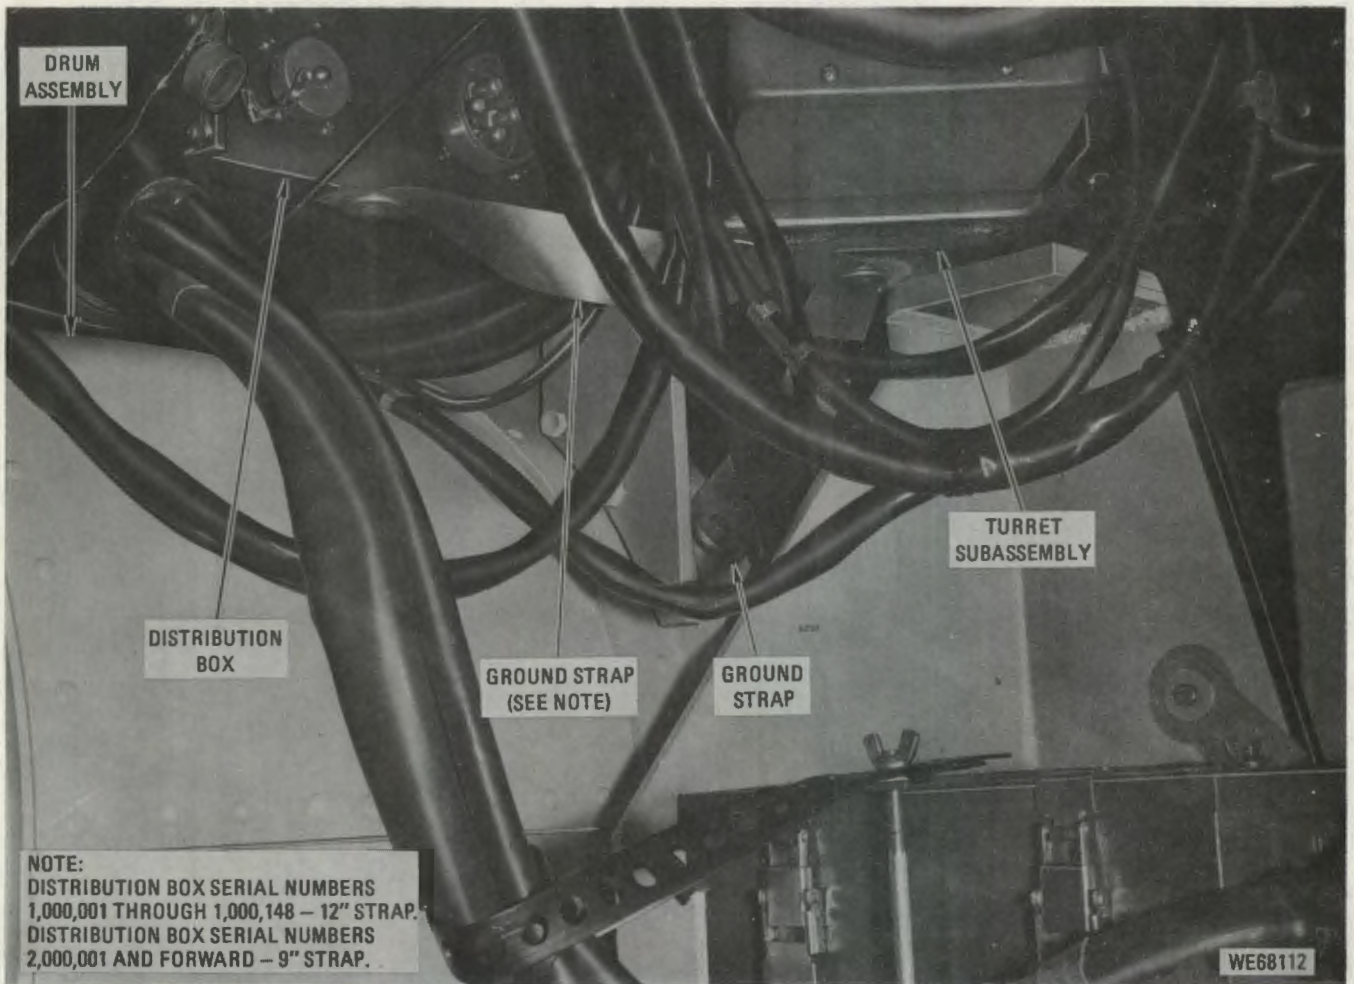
Ground straps between distribution box and turret subassembly, and between drum assembly and turret subassembly.
